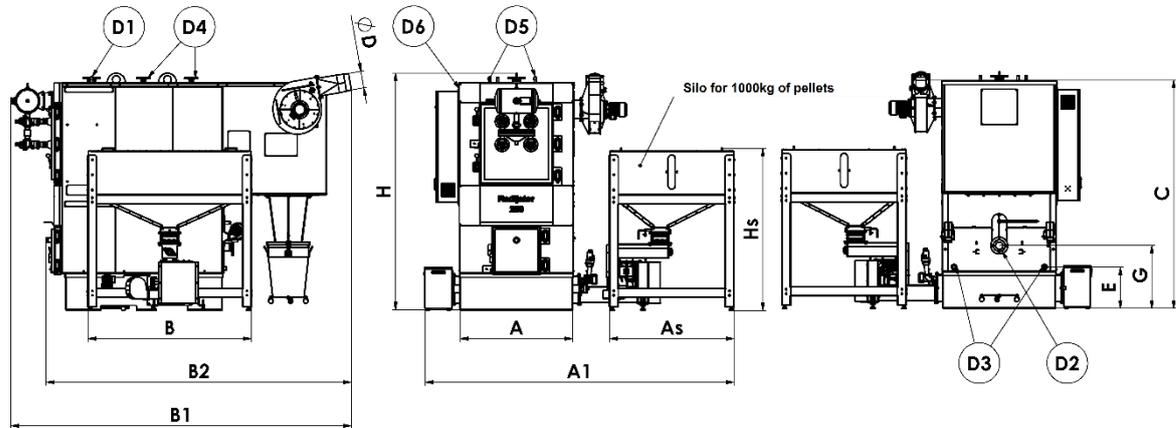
The design with dimensions and connection ports for TKAN 80 Integra i TKAN 100 Integra
